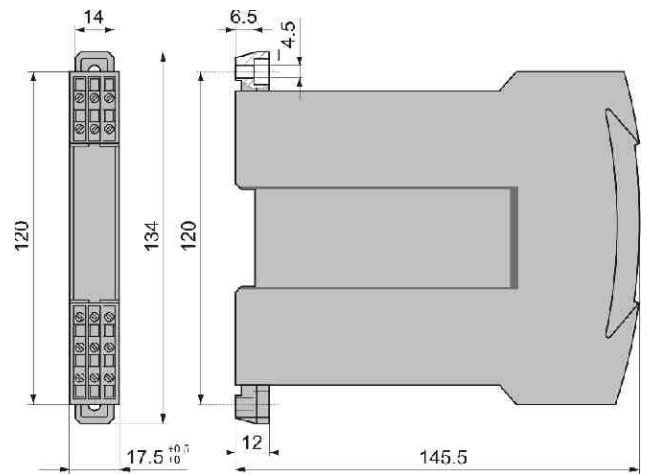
Ziegler TI 807-1.... (housing S17) screw hole mounting. brackets pulled out.
